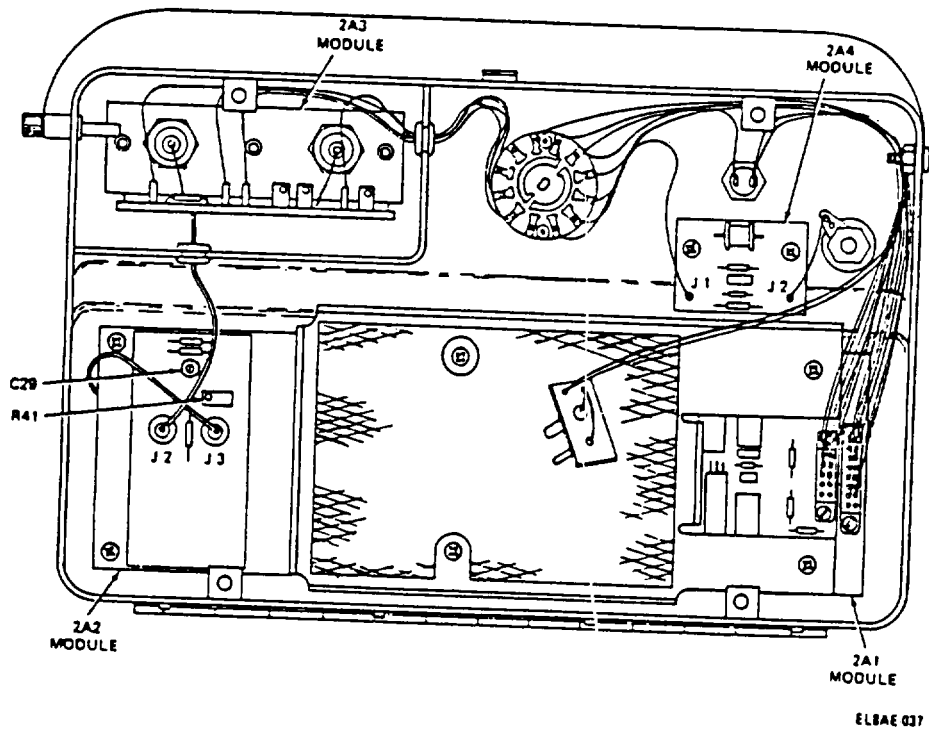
Test Set (S.N. 635 and Up) Interior View from Bottom
